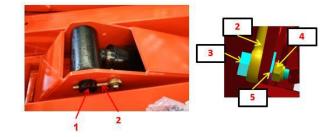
Assembly of lift cylinder (upper end 1. Pin 2. Safety pin 3. Bolt 4. Nut 5. Washer
